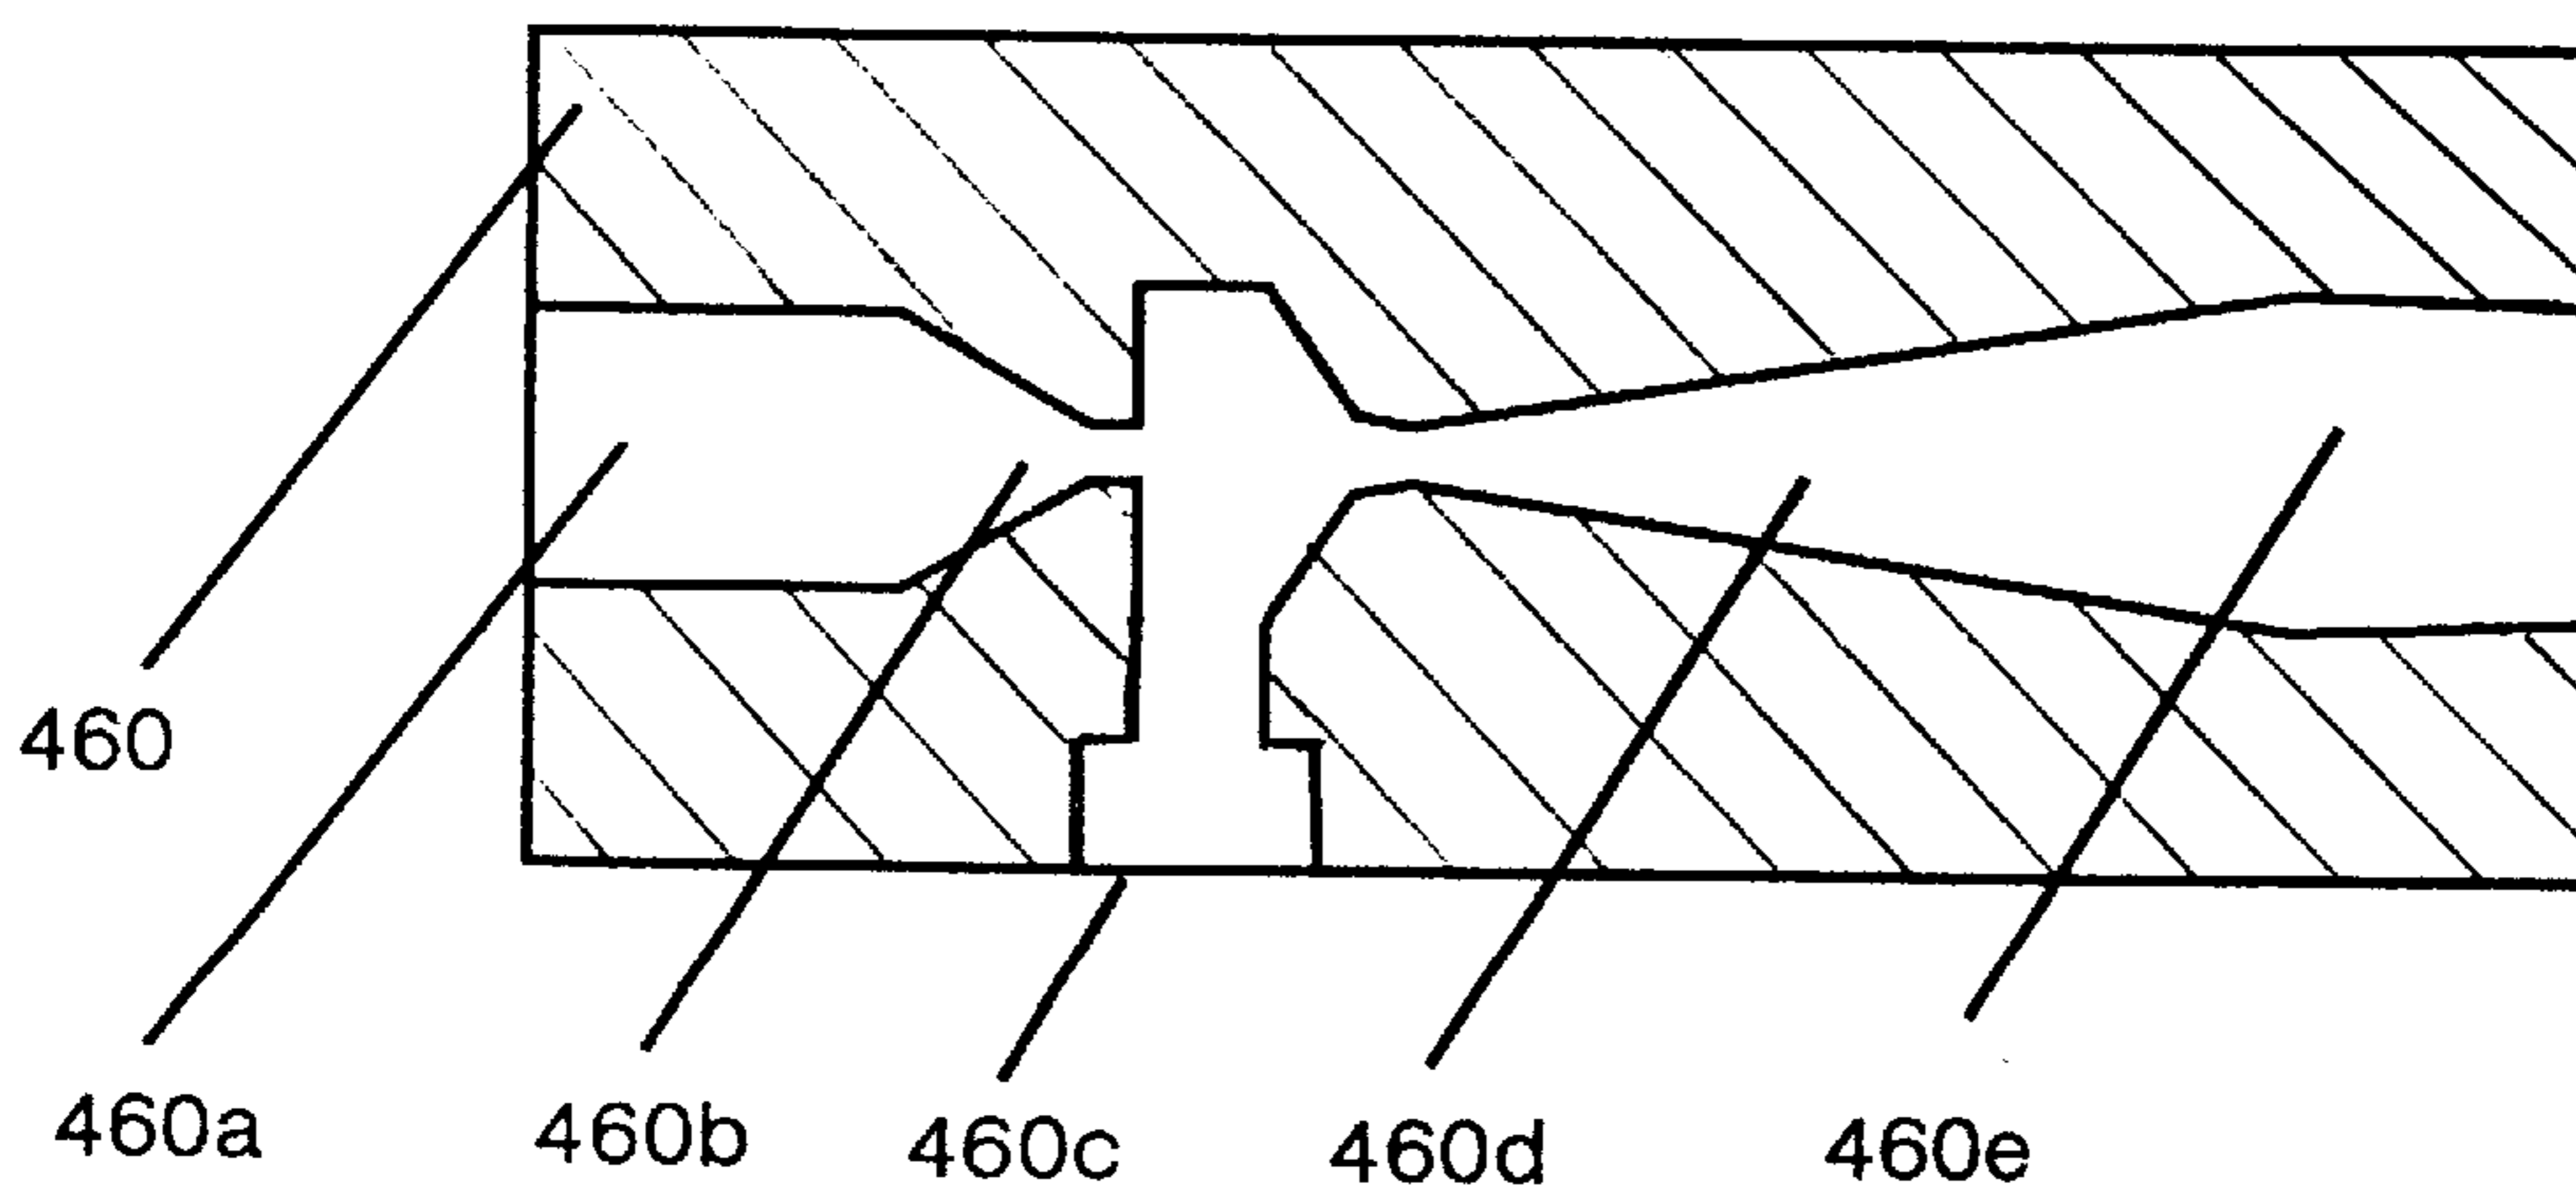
SECTION THROUGH EJECTOR PUMP 460
